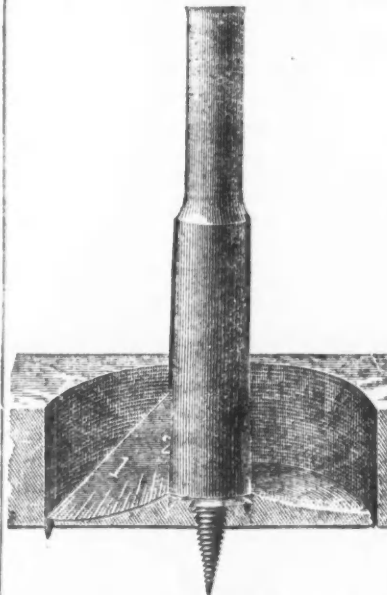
General View of the Tool in Boring Through a Board, the Spur Cutting through the Bottom.
